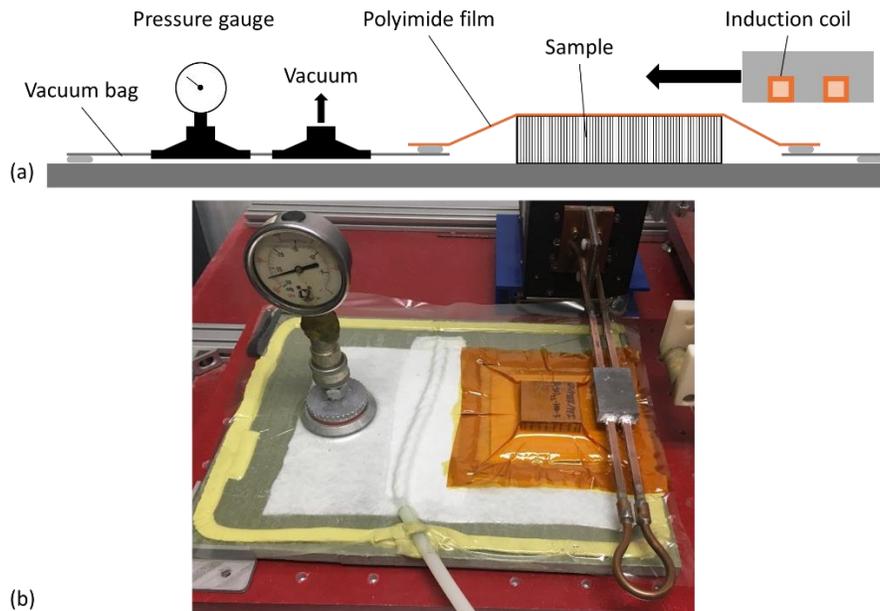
(a) Schematic and (b) picture of the vacuum assisted induction welding (Vac-IW) setup. Reproduced from [14].
